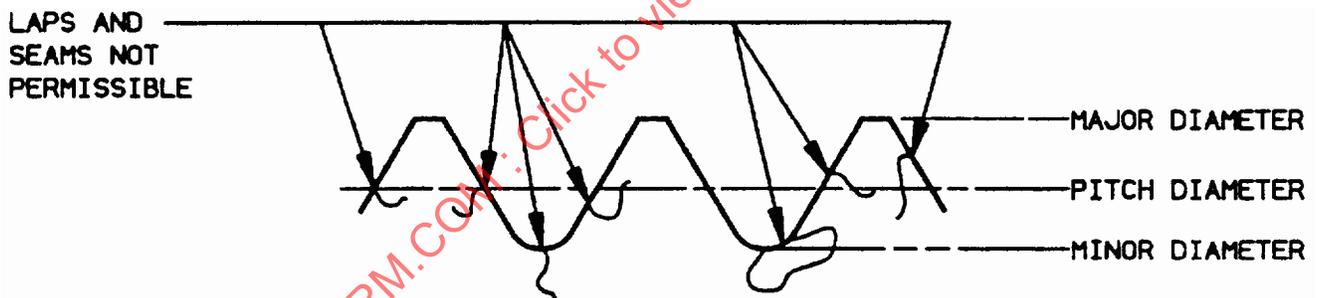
LAPS, SEAMS, AND SURFACE THREAD
